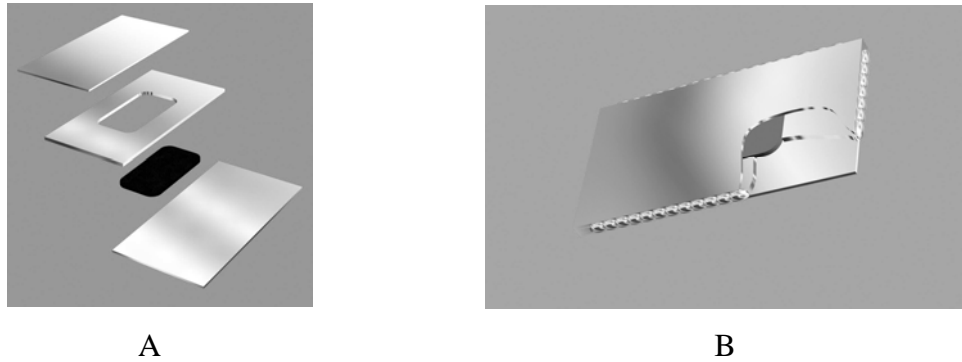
Picture-Frame technique. A) Assembling B) After welding
